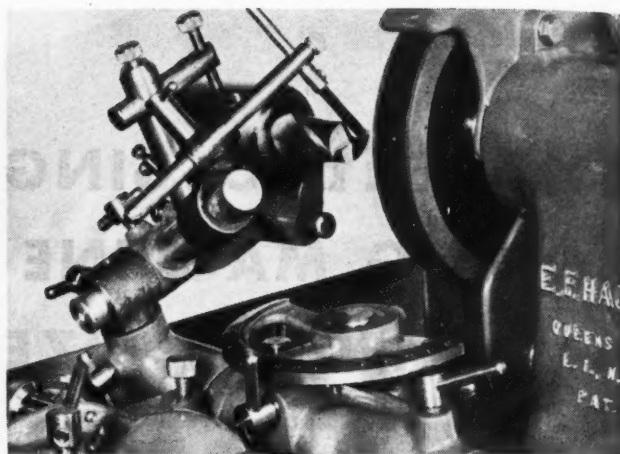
Set-up Using New Hager Attachments on Carbide-tool Grinder for Sharpening End-mill
